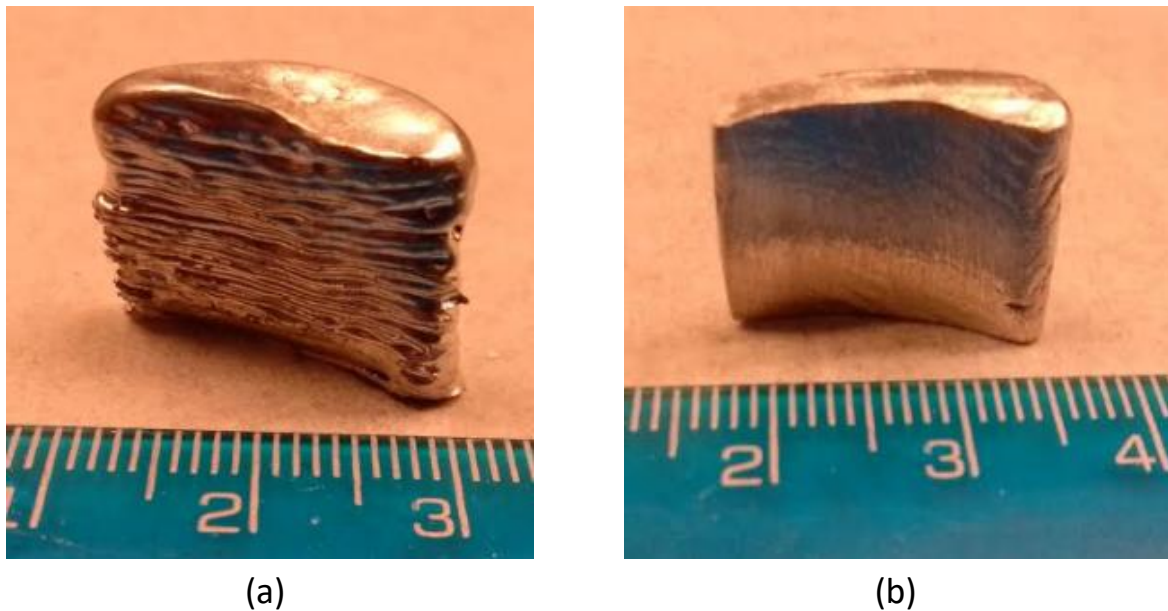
Metal Part (a) Cast Metal Part with Rough Surface, (b) Cast Metal Part Post Surface Finishing
